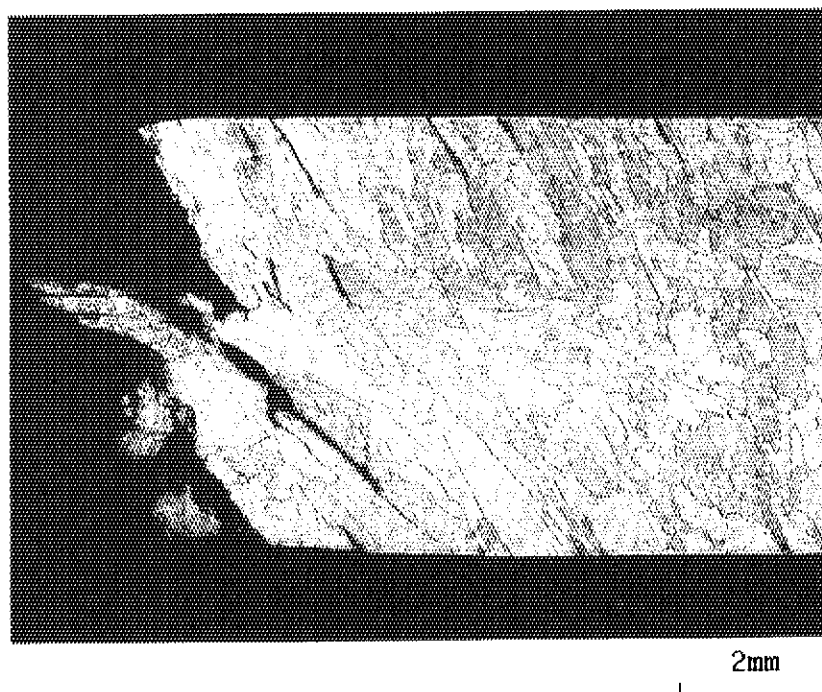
Microstructure of fracture section for Hastelloy XR weld metal (900°C, 1190.8h, 45.0MPa, thickness: 15mm, specimen No.KD-2)
